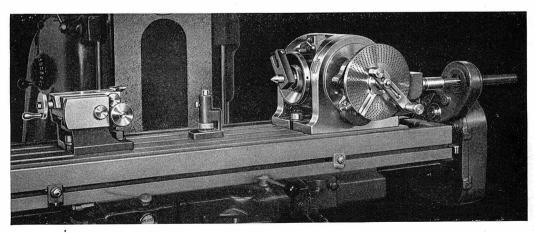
12" Dividing Head, Tailstock, Steadyrest and Driving Mechanism
